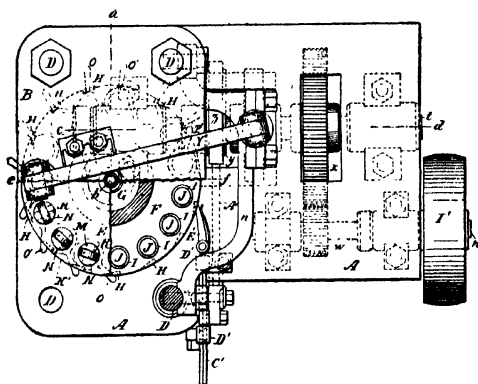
The Miller Machine for Molding Pyroxylin Plastics.
